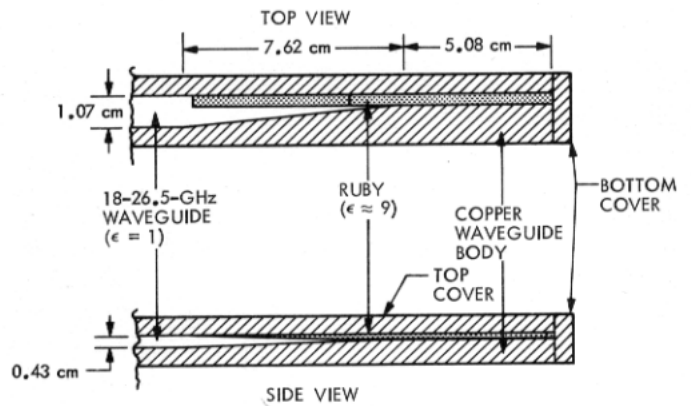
Cutaway drawing of ruby-filled waveguide and matching section
